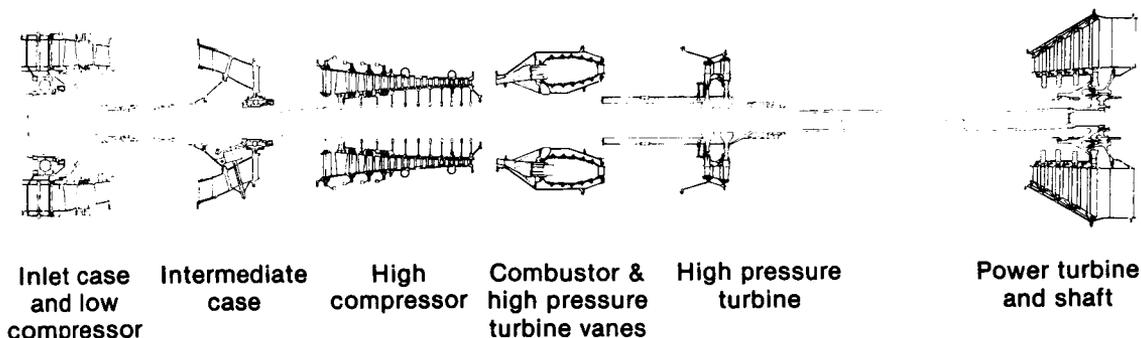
Turboshaft Engine Modules; "Non-Free" Power Turbine (Two-Spool) Engine - The STS678 engine system is comprised of six major modules. (J27638-70)
